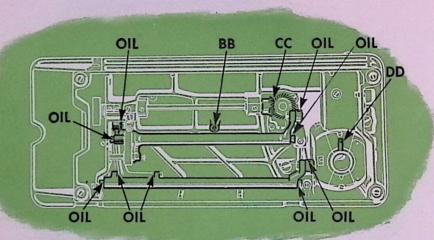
Oiling Points in Base of Machine Also Showing Motor Grease Tube (DD)
